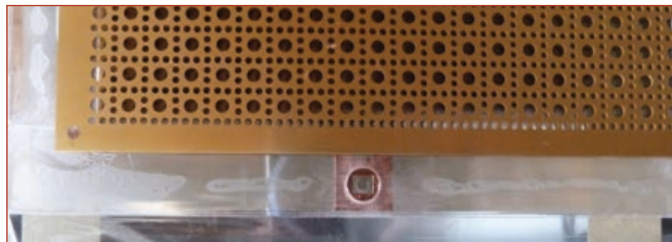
Alignment of the diaphragm contact holes is the final stage of the gluing process.
